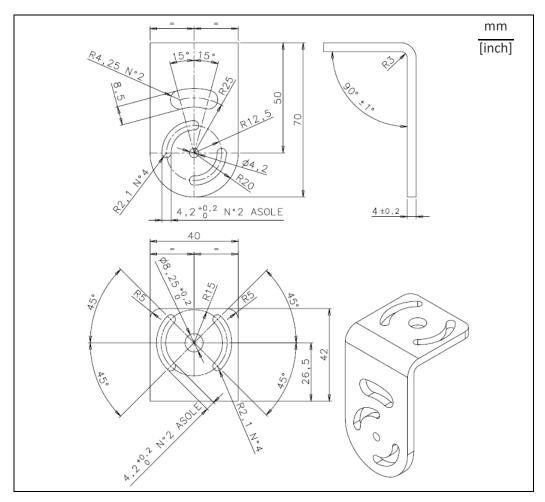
Overall Dimensions: BK-32-000 Standard Fix Bracket for Matrix 320 with 14 LEDs illuminator
